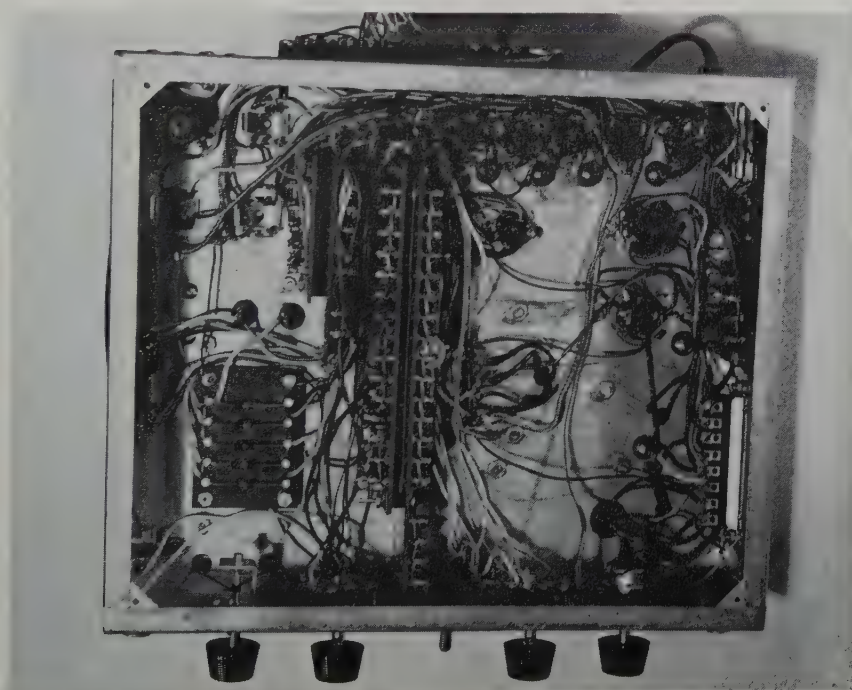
(b). Bottom view of receiver packaged using the component grouping method.
